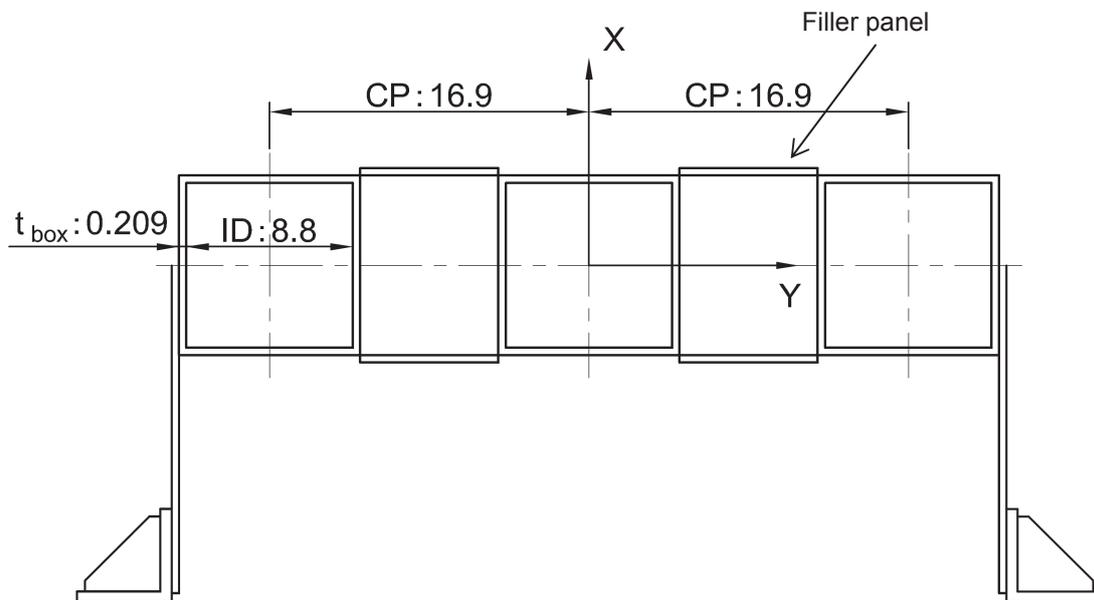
Sketch showing dimensions of the cross section of the fuel cell including filler panel
